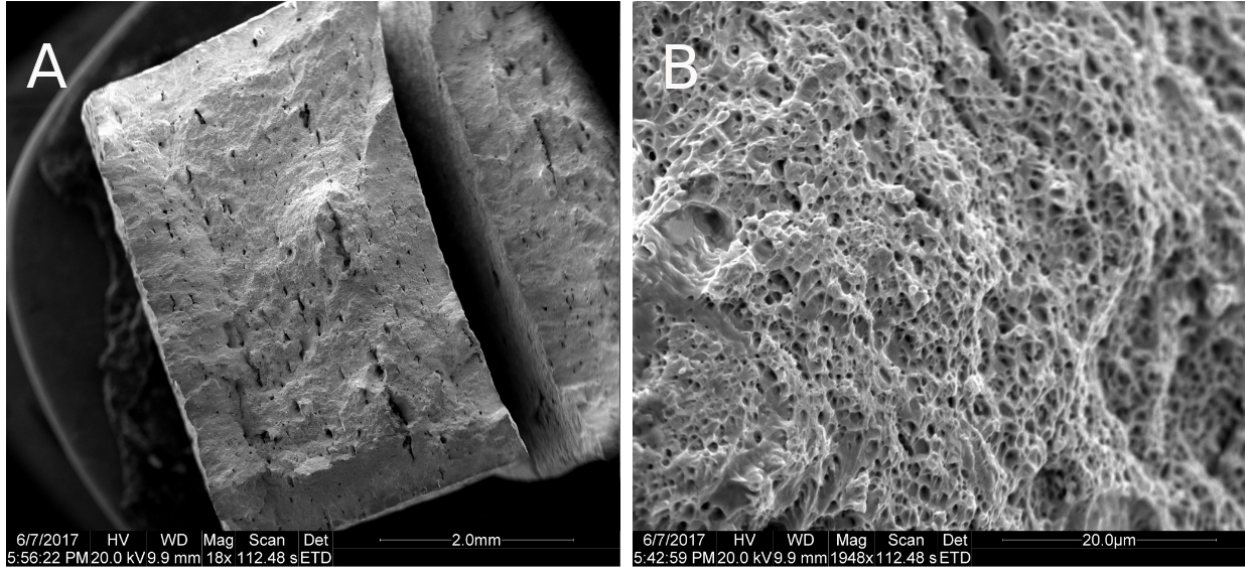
A) Voids can be seen in the fracture surface. B) At higher magnification dimples can be seen, indicating ductile fracture.
